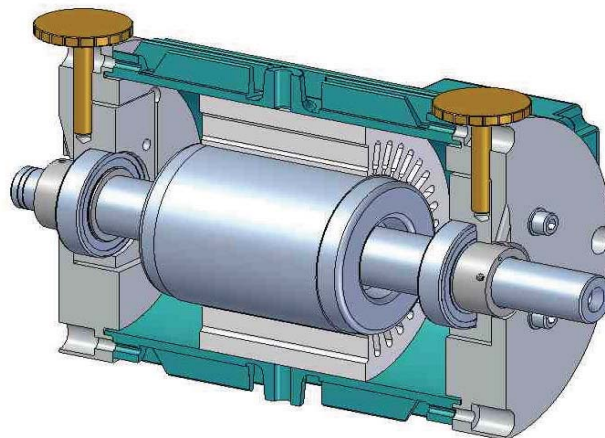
Sectioned view of the test motor showing the adjustable static eccentricity arrangement.
